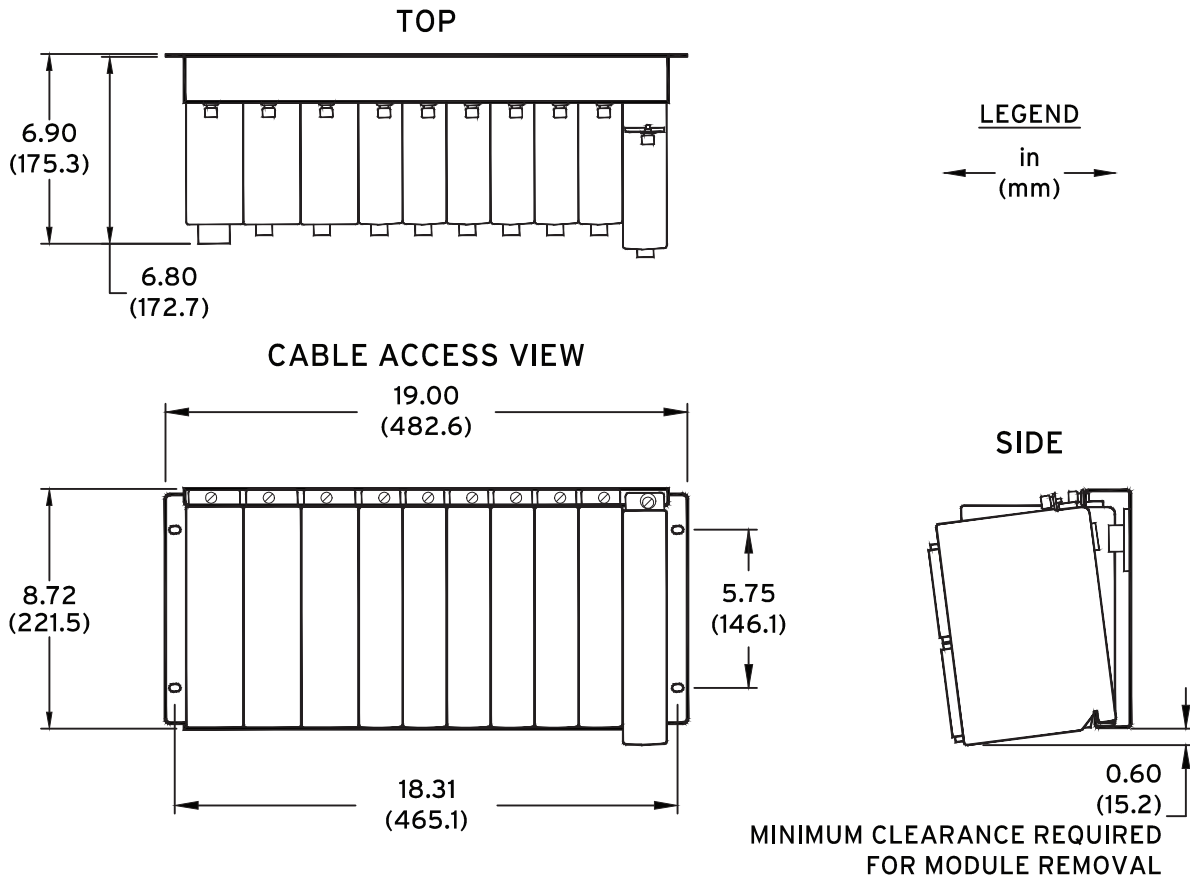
SEL-2240 10-Slot Rack and Surface-Mount Dimensions
